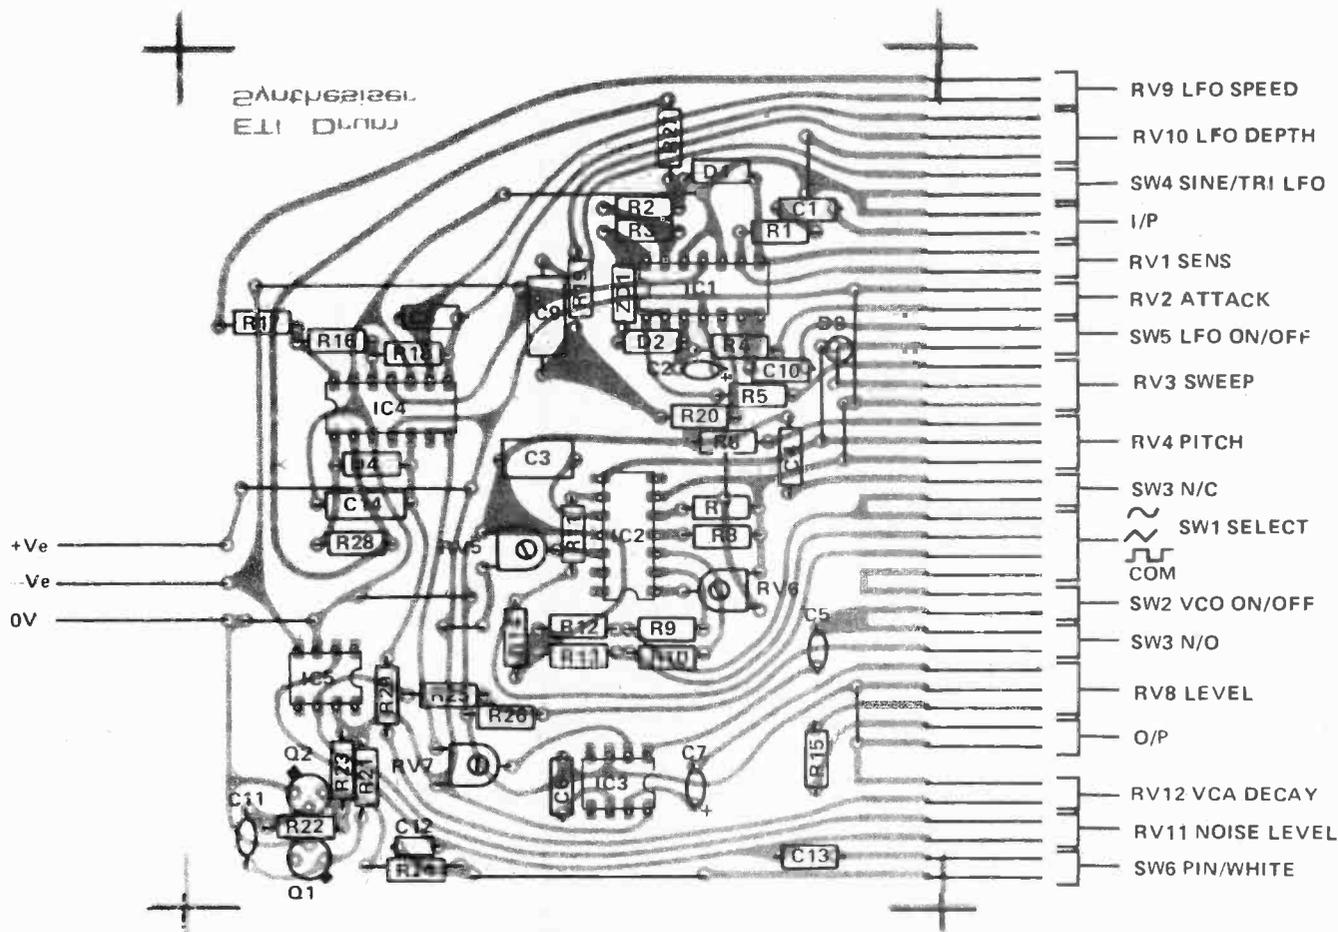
Component overlay of the control circuit board. Take care when wiring the edge connector.
